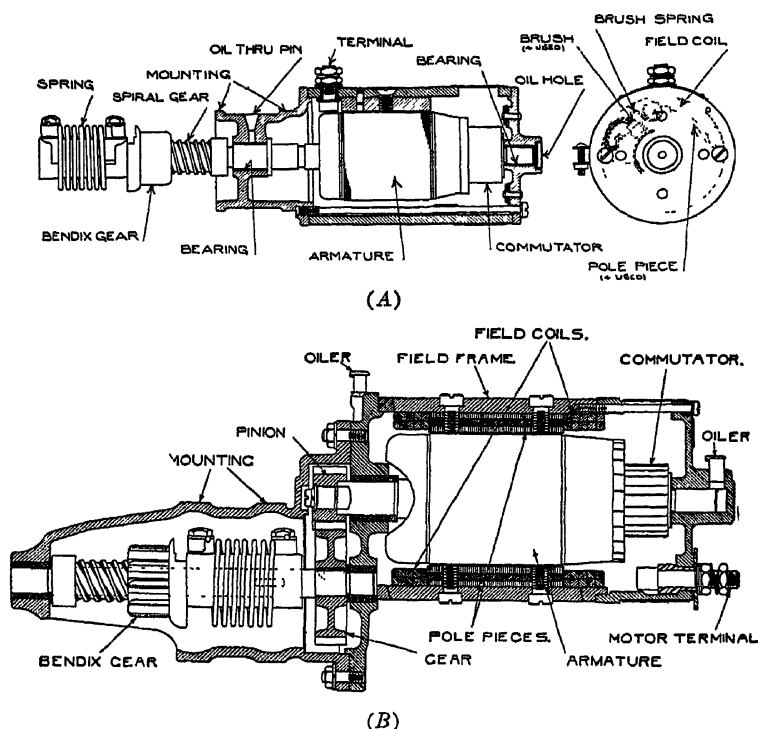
(A) A sectional view of typical starting motor with Bendix drive—inboard type—for barrel mounting (Delco). (B) Sectional view of Delco starting motor with Bendix drive and reduction gears—outboard type.
